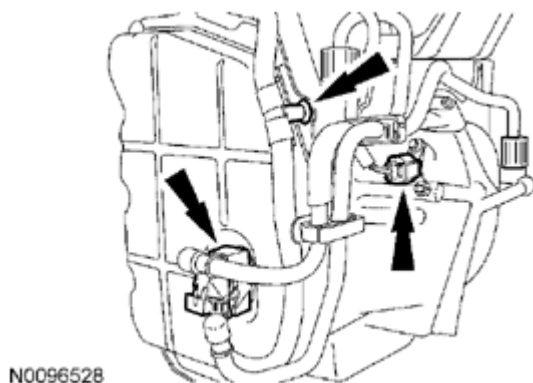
Locating Transmission Electrical Connectors, Wiring Retainer And Stud Bolt
